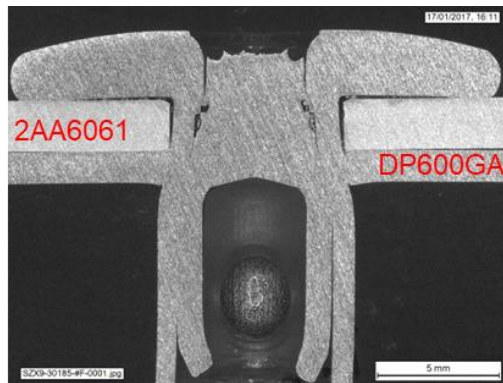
Cross section of a blind rivet joint 1.4 mm DP600 GA- 2 mm AA6061
